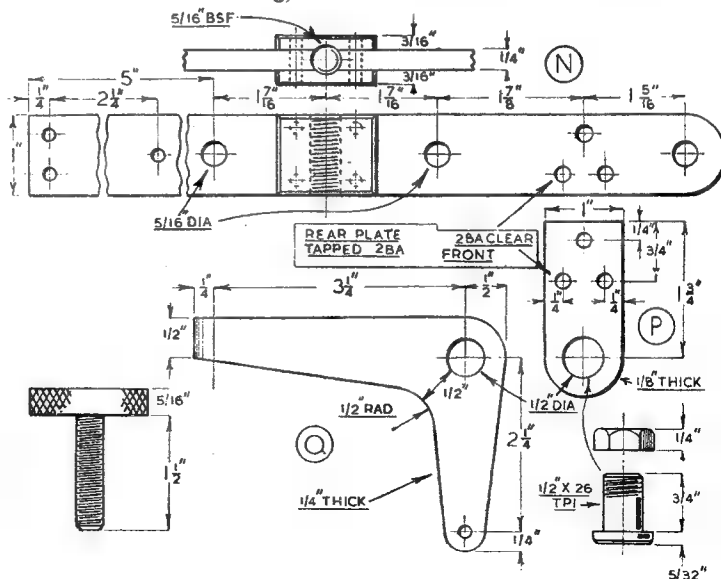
The saw back—N; the fulcrum plates—P and cross-bolt; the bell-crank lever—Q and adjusting-screw
